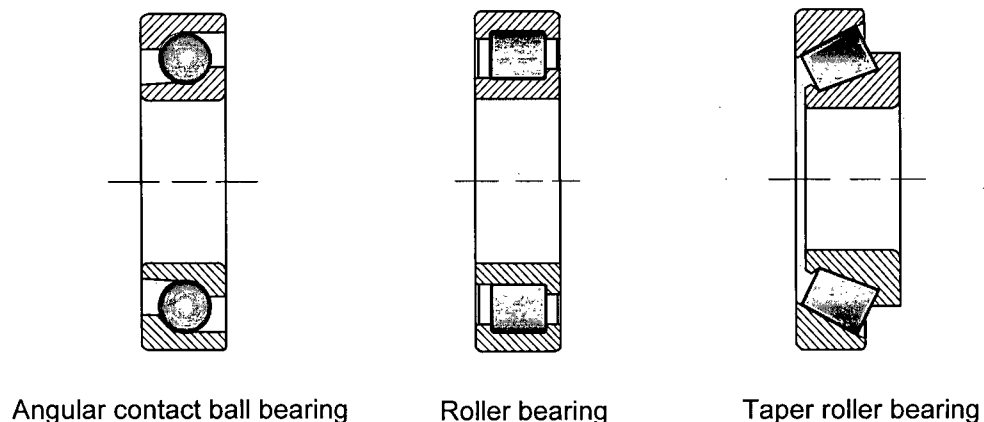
Three types of commonly used bearings in high-speed spindles
